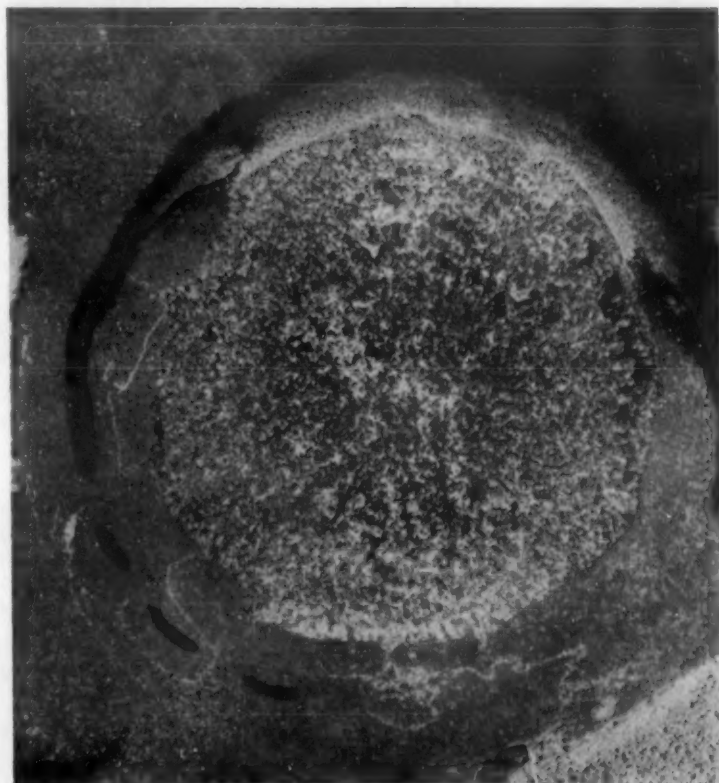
Radial, spokelike appearance—under the microscope—of a spot weld. These "spokes" also show up clearly on a radiograph (although the latter reproduces very poorly in the printing process).
